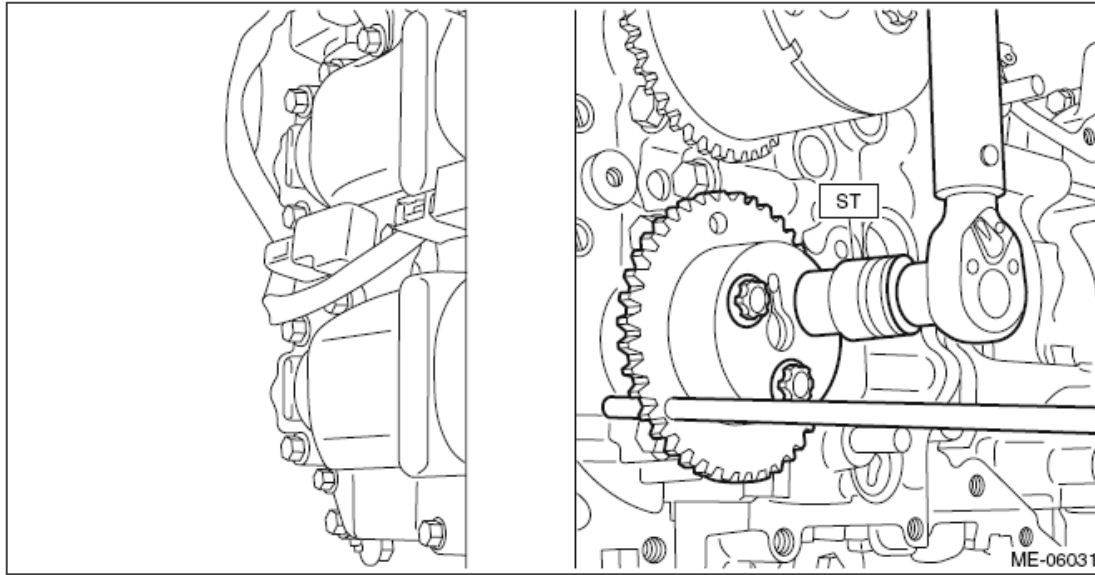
Installing Exhaust Cam Sprocket Bolts
